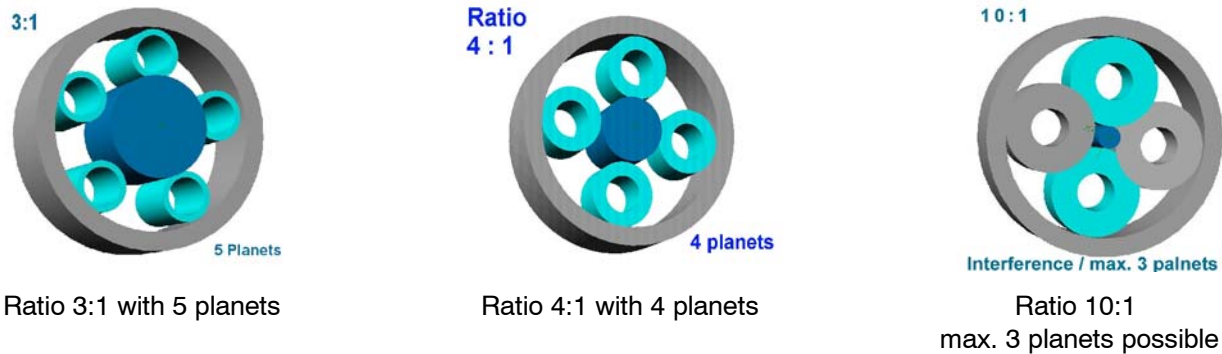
Definition of the (Reduction) Ratio for a simple planetary gear arrangement having a stationary ring gear. The input is at the sun-gear and output at the planet carrier shaft.
